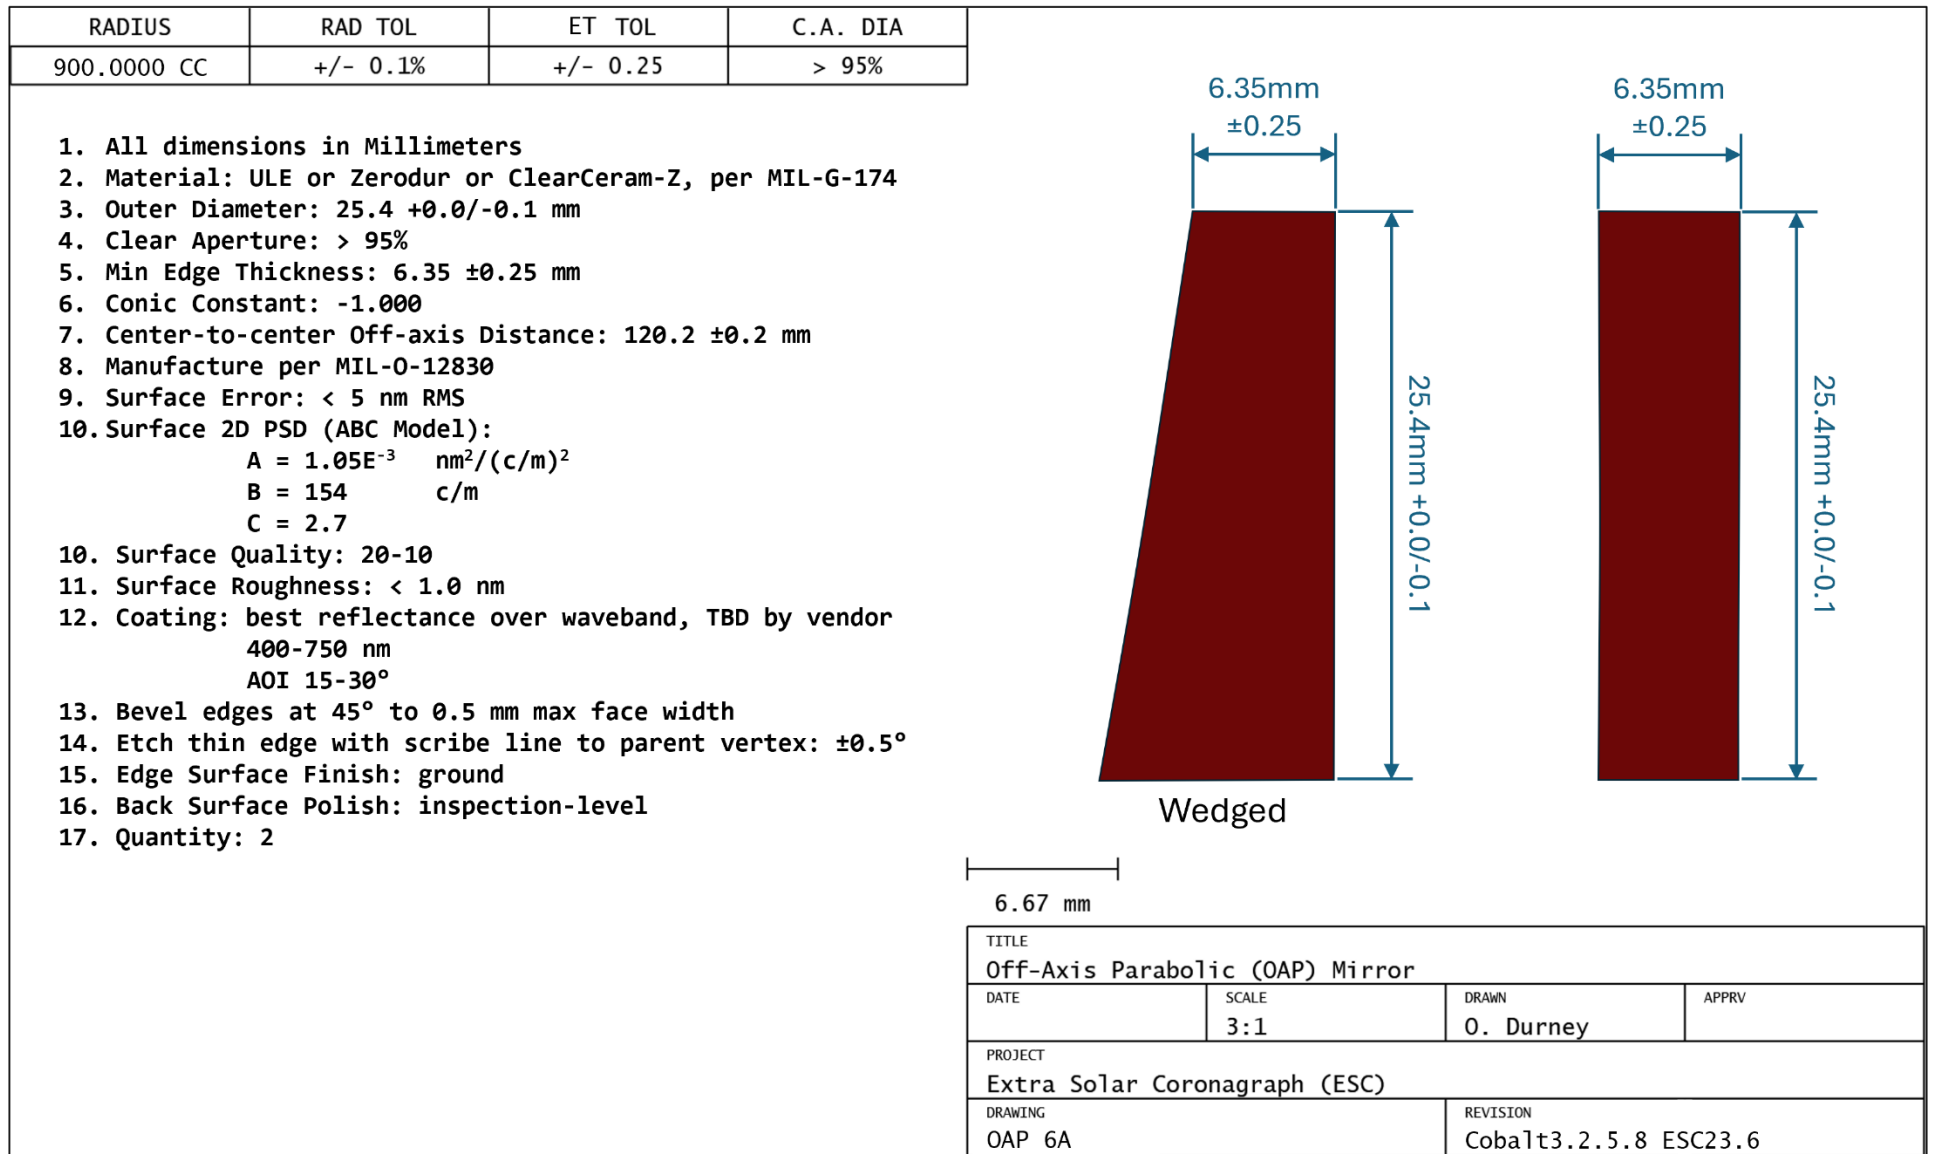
Off-axis parabolic mirror, OAP 6A drawing
